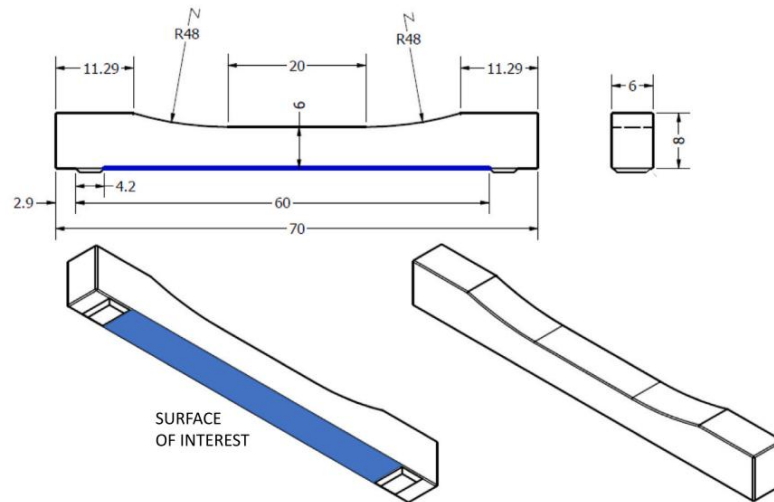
The specimen used by [8] implemented into 4PB fatigue tests of AM surfaces.
